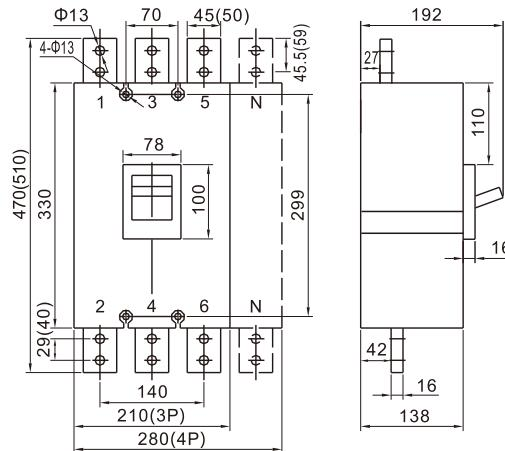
RDM1-1250/1600 circuit breaker overall and installation dimension (Figure in brackets is the dimension of 1600A circuit breaker)
